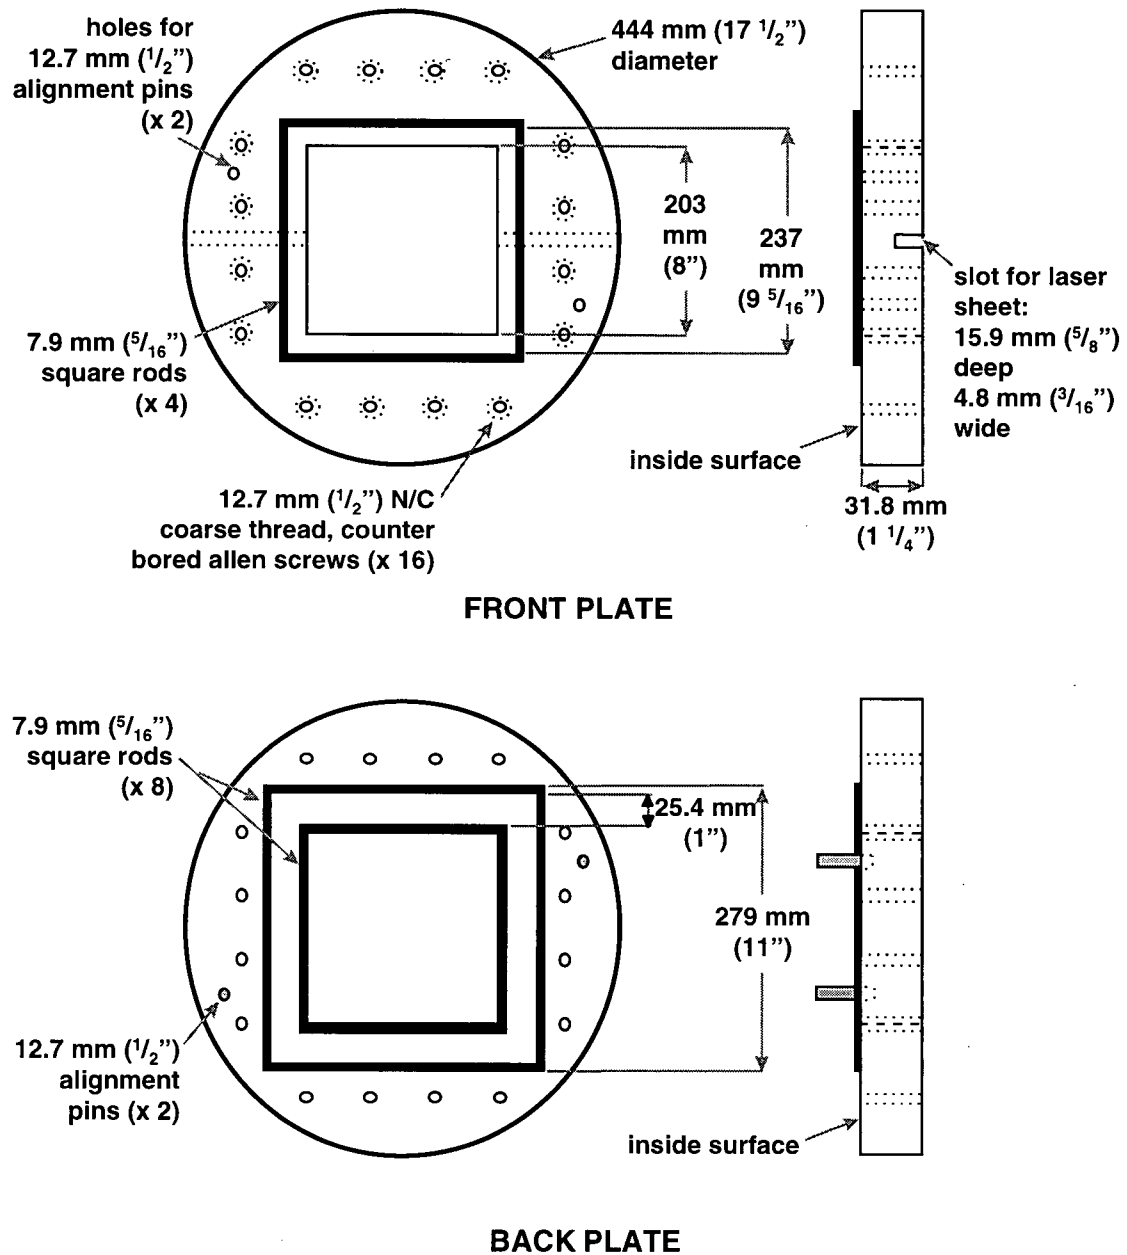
Detailed schematics of UBC test fixture, showing front and back plates.
